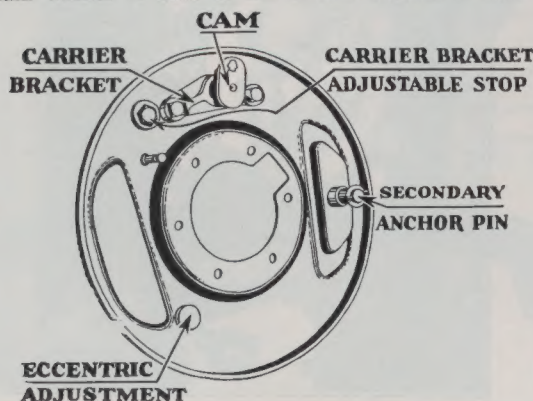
Outside end view of Bendix assembly with carrier bracket adjustable stop
